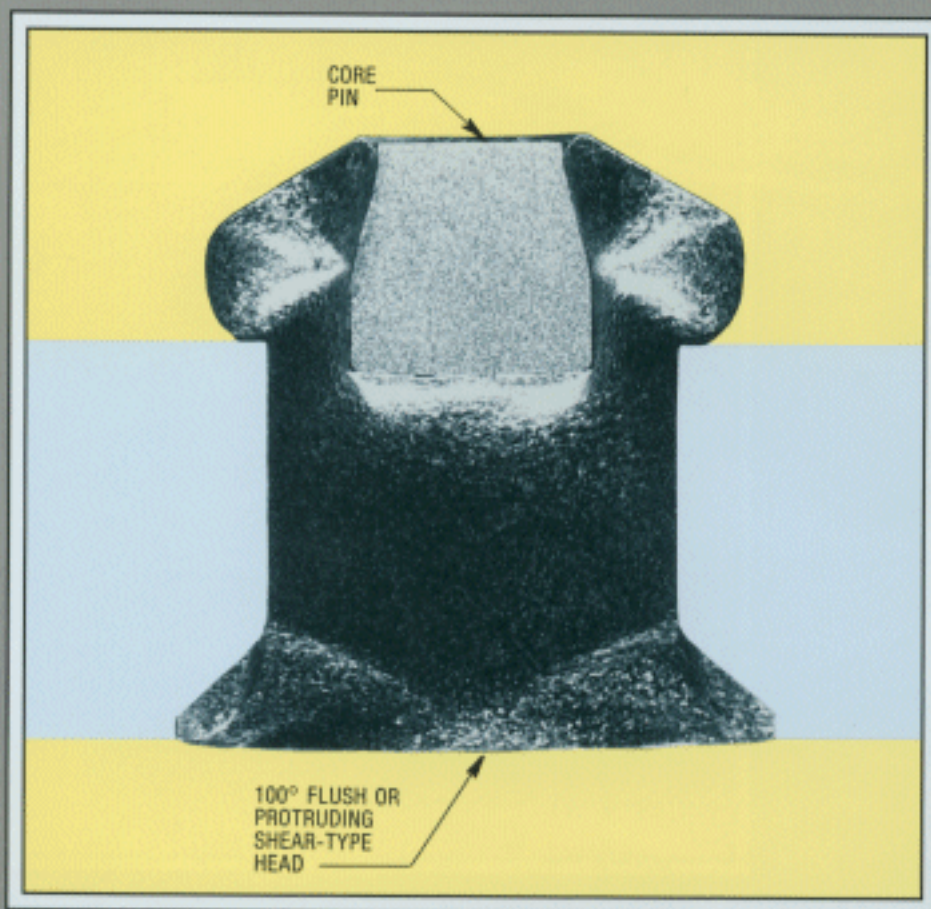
Cross-Sectioned, enlarged view of Hi-Set Rivet.
